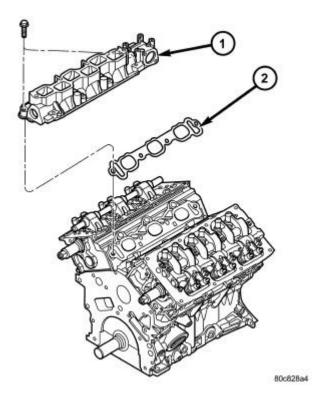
Lower Intake Manifold Courtesy of CHRYSLER LLC
